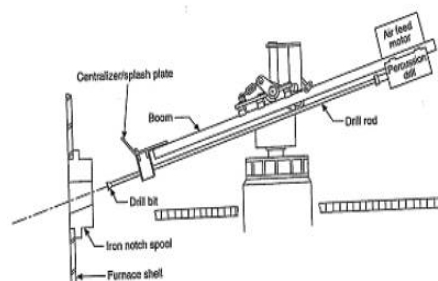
Dimensional view of Drifter Position in drilling of tap hole.
